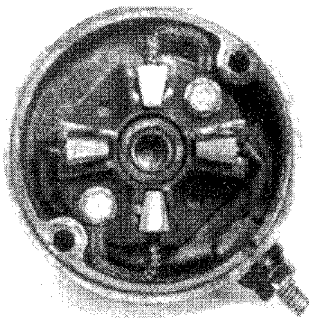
During installation, make sure the positive and negative brushes are properly positioned in the lower cap...
